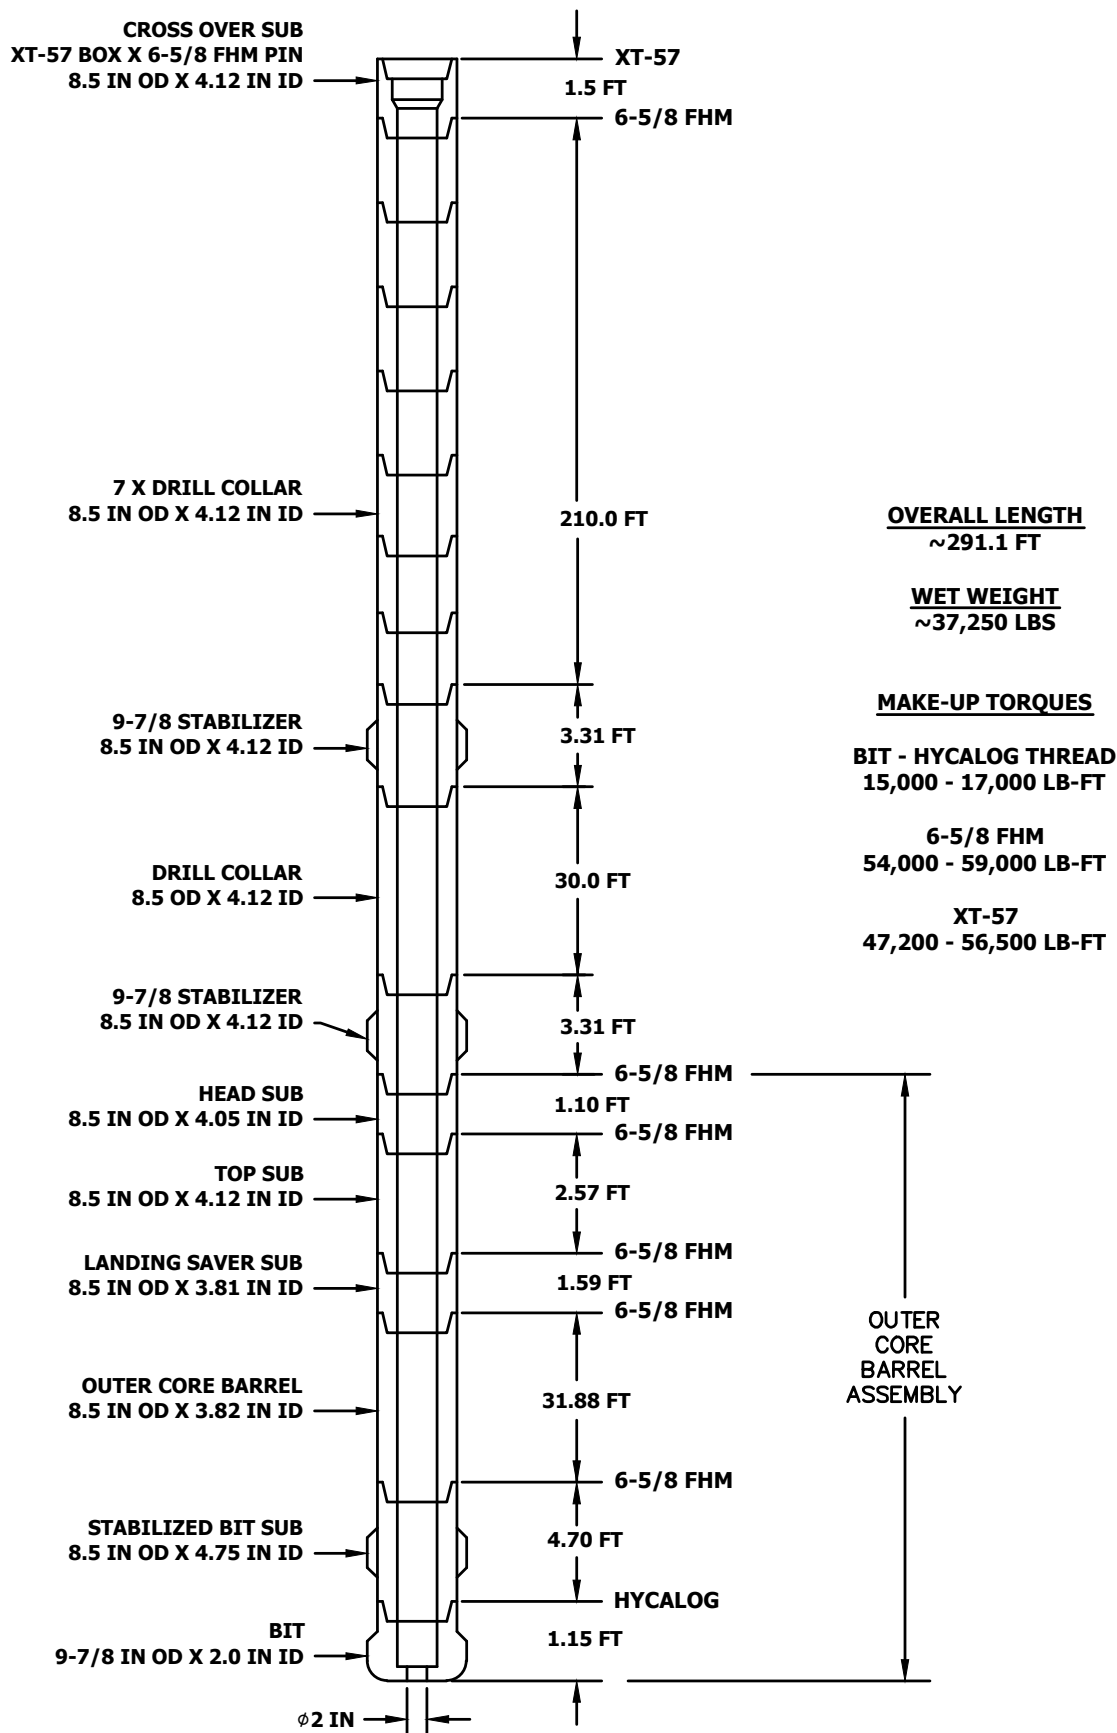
Hole H002 (> 8,748 ft RKB) bottom hole assembly (BHA) in the pressure coring tool with ball valve (PCTB) Cutting Shoe configuration (PCTB-CS) with seven drill collars above the first stabilizer. Box and Pin specifications include XT-57, Full-Hole Modified (FHM), and HYCALOG. Sub assembly (SUB), inch (IN), pounds (LBS), feet (FT), foot-pounds (LB-FT), inner diameter (ID), outer diameter (OD).
